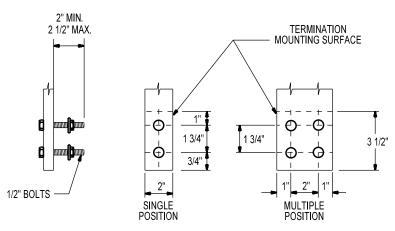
TERMINATING BOLT AND DRILLING DETAIL OF TERMINATING FACILITIES
